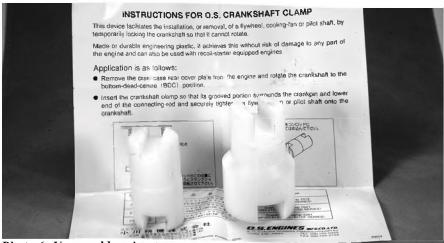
You could make stop tools like this using a wooden dowel if you have a regular use for them.
